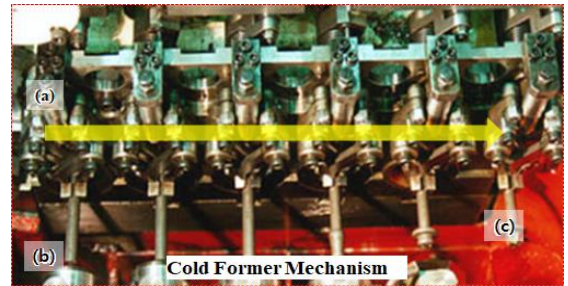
Cold forging mechanism (a) Dies tool, (b) Punch tool, and (c) Product
